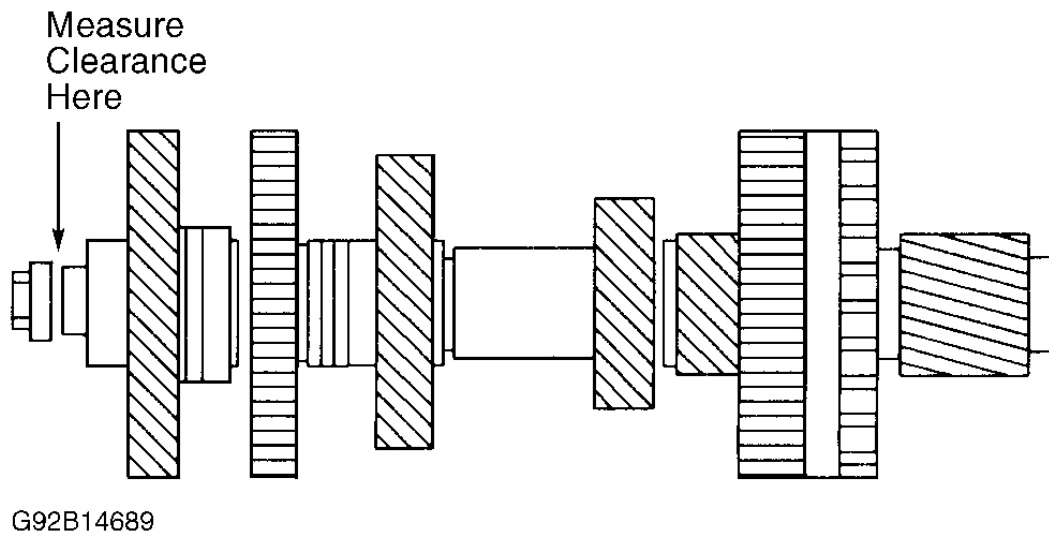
Checking 1st Gear-To-Thrust Washer Clearance
